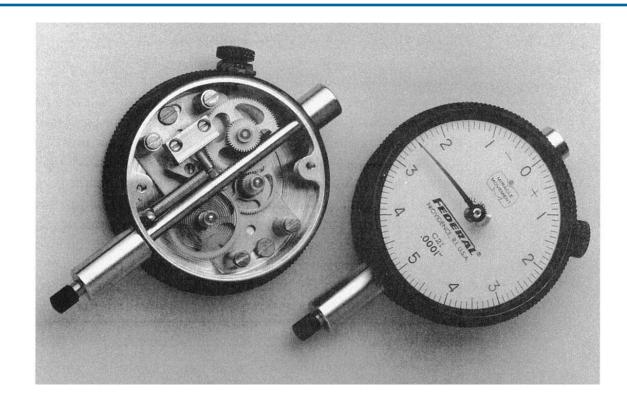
Dial indicator: front view shows dial and graduated face; back view shows rear of instrument with cover plate removed (photo courtesy of Federal Products Co.).
